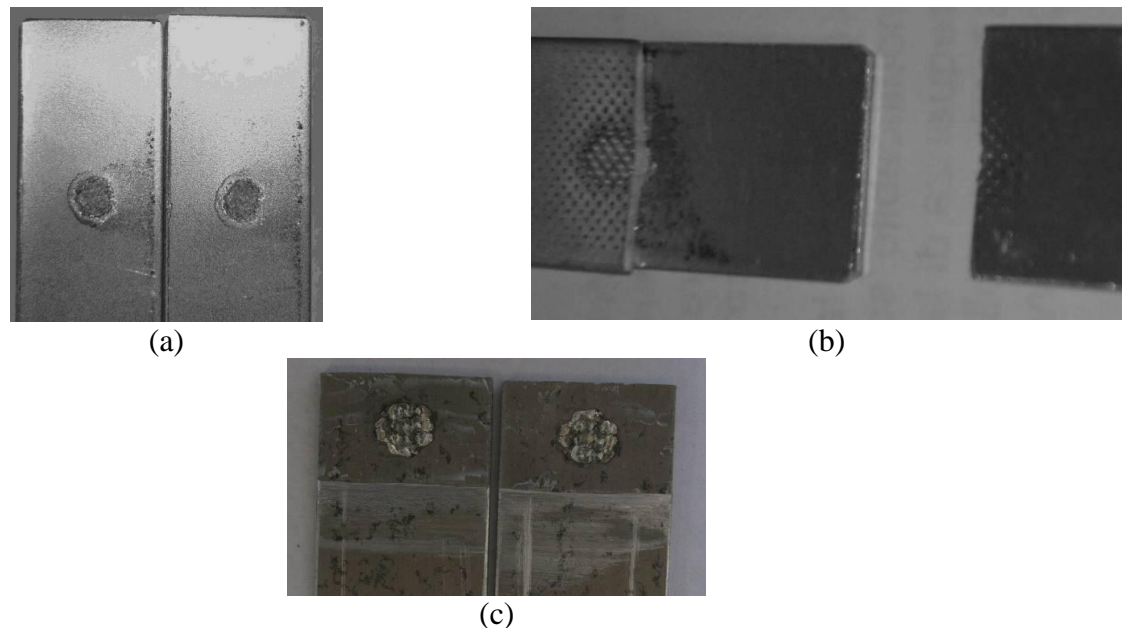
Macroscopic fatigue failure modes: a) and b) USMW aluminum joints; c) hybrid magnesium joints.
